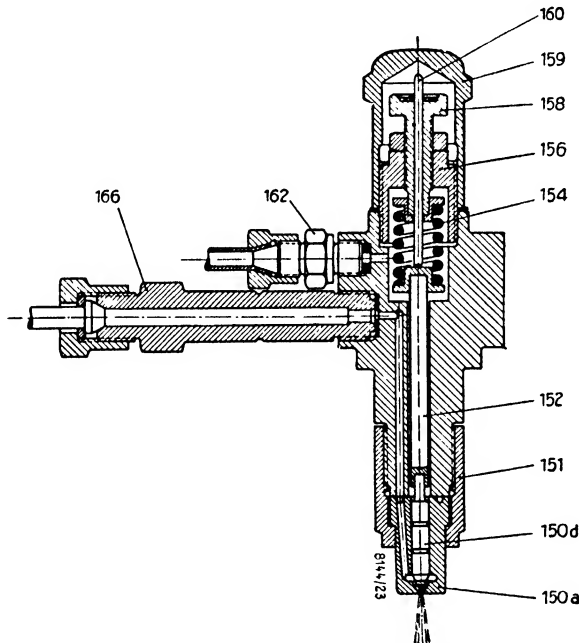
SECTION THROUGH THE BOSCH NOZZLE HOLDER.
